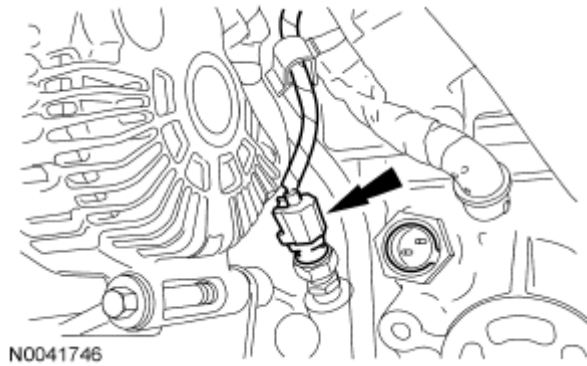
Locating Oil Pressure Sender Electrical Connector
